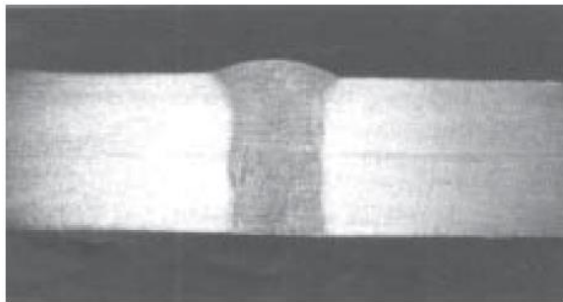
Shape of butt joint in a 4mm thick titanium alloy plate welded with Activated TIG.
